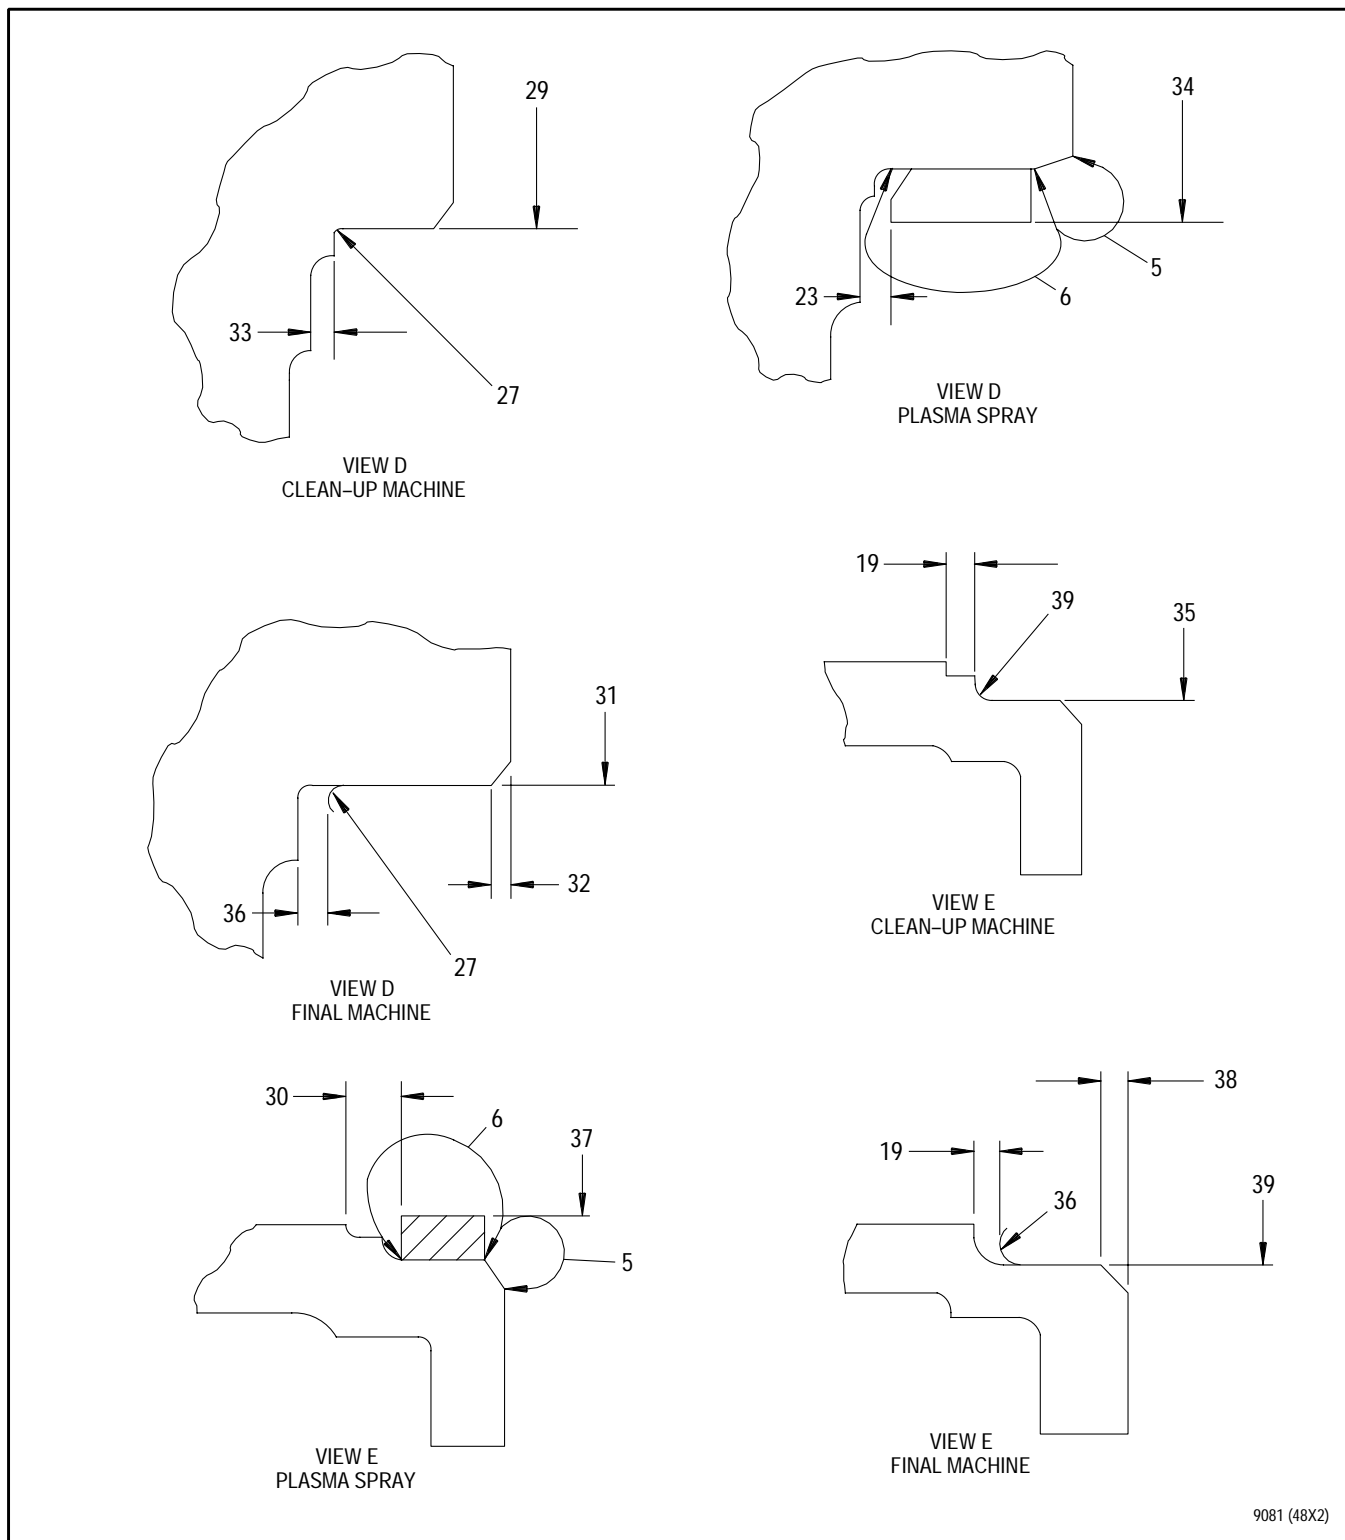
Compressor Intermediate Case Assembly - Plasma Spray Repair (Sheet 4 of 5)
